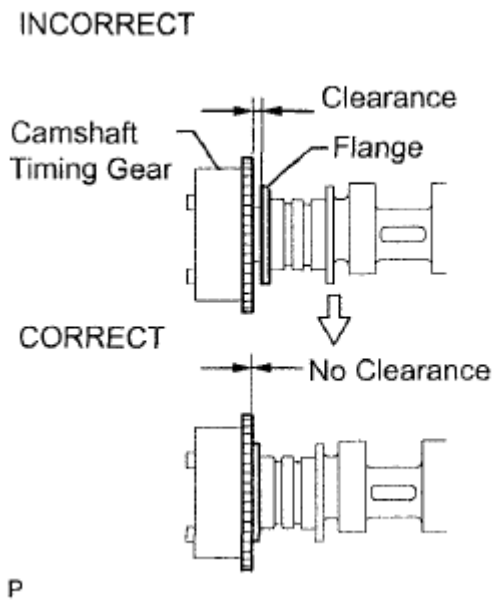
Identifying Clearance Between Camshaft Timing Gear And Camshaft Flange
